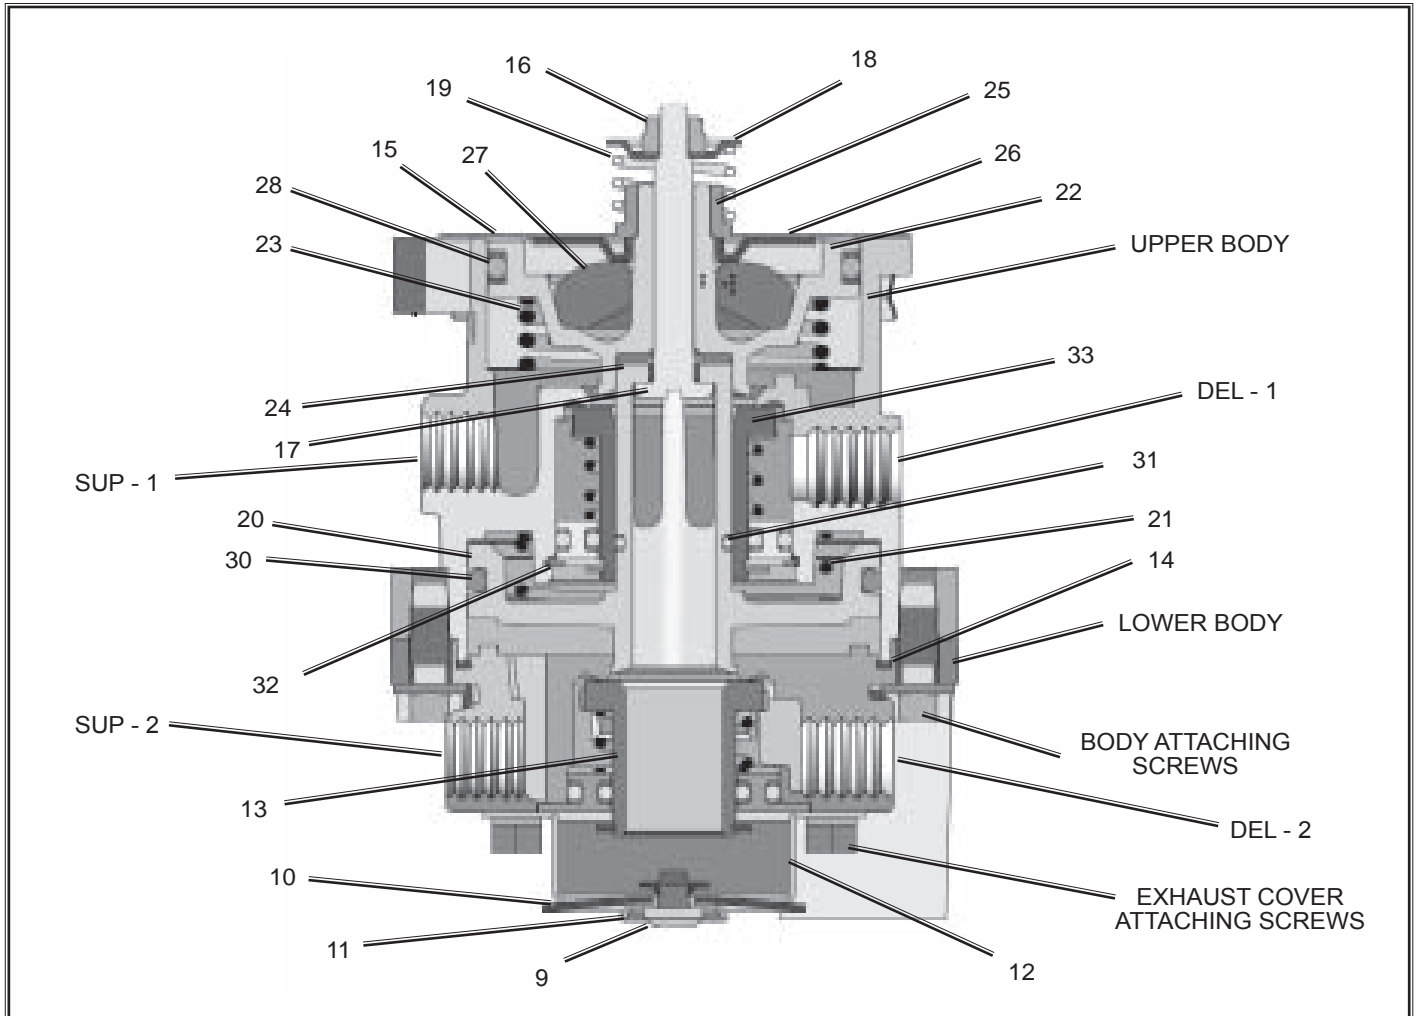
E-8P™ DUAL BRAKE VALVE SECTIONAL VIEW
